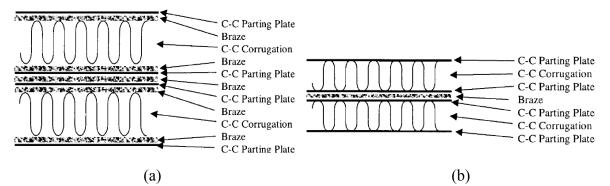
(a) Conventional heat exchanger assembly, (b) Integral heat exchanger assembly [143]
